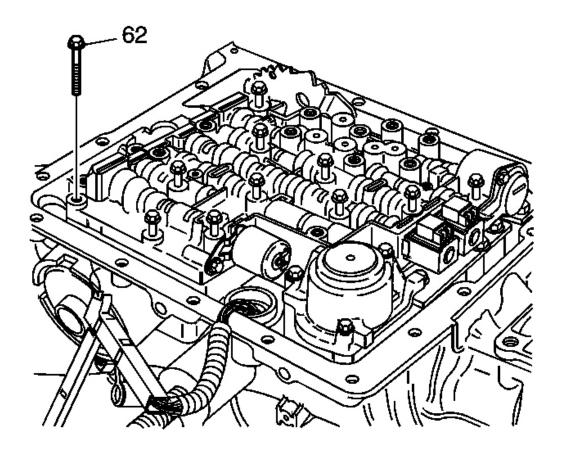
Installing Valve Body Courtesy of GENERAL MOTORS CORP.
